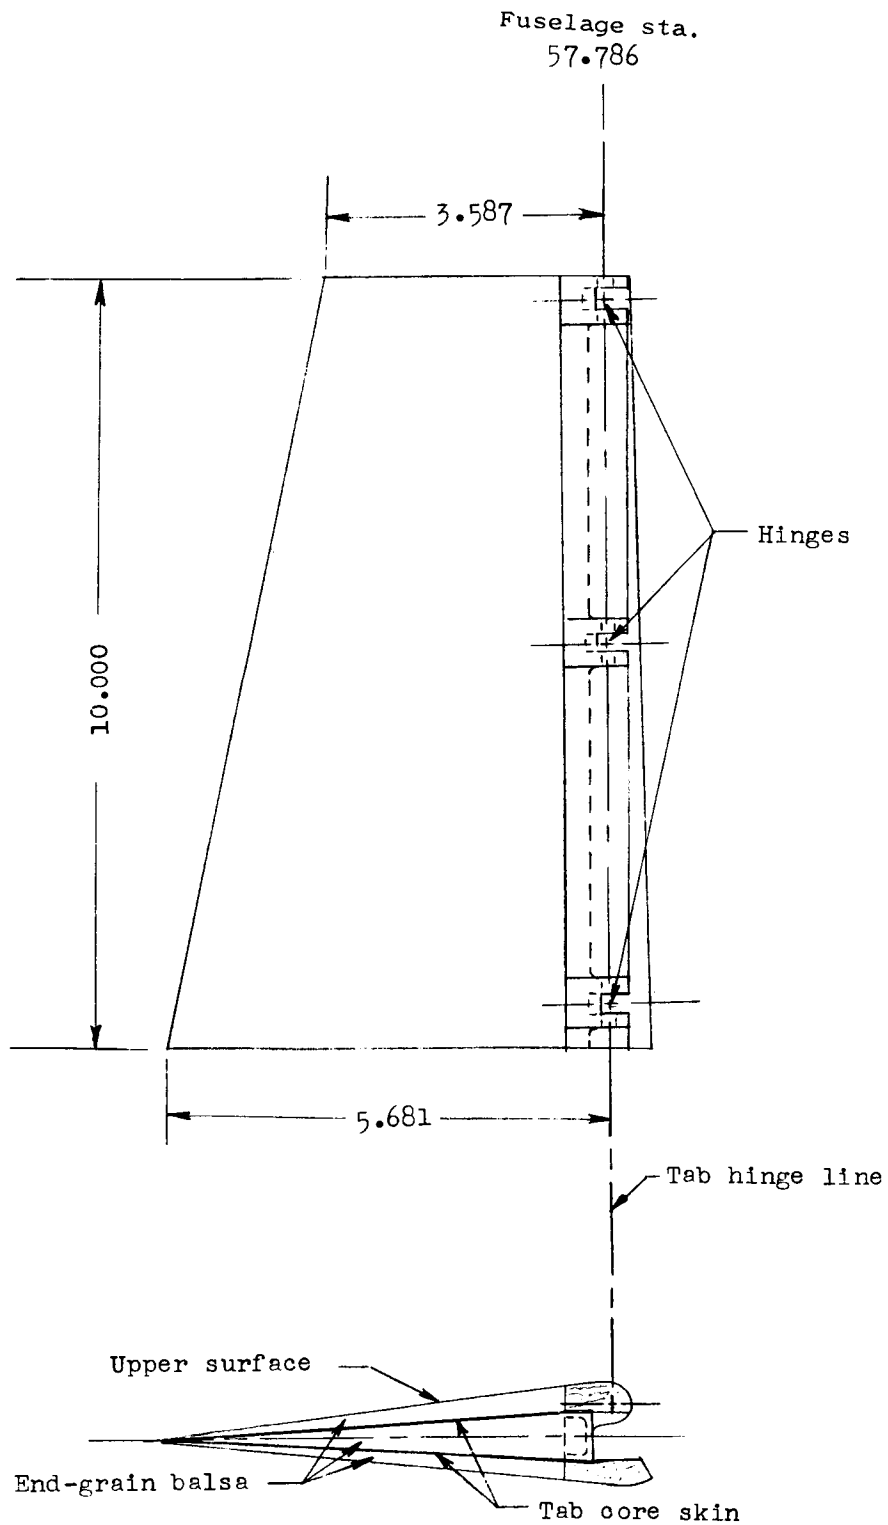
Two-view drawing of tab. All dimensions are in inches.
